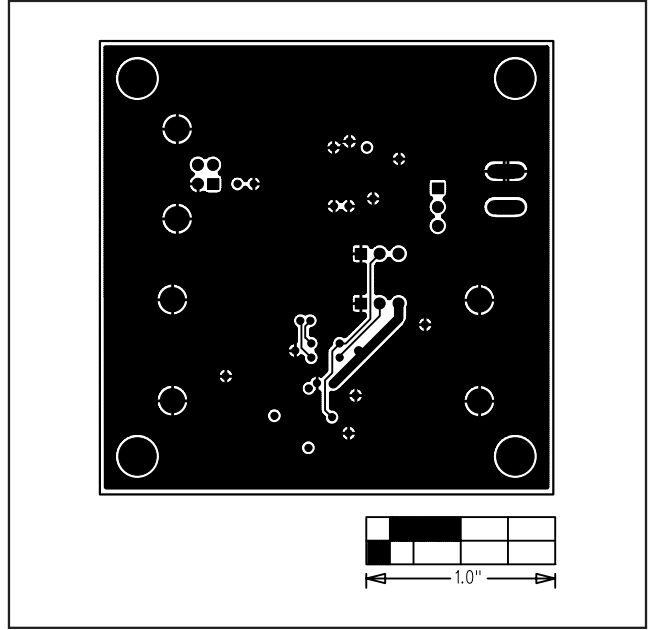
MAX4983E EV Kit PCB Layout—Solder Side
